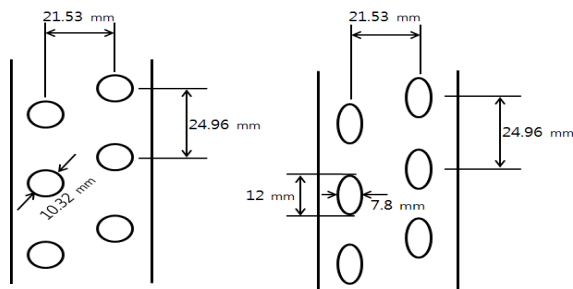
Geometries of circular- and oval-type heat exchangers.
